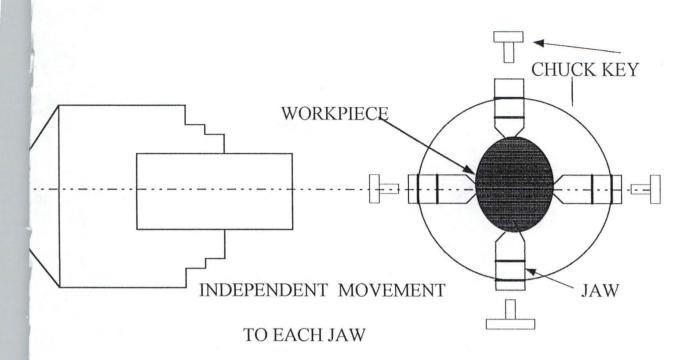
4 - JAW INDEPENDENT CHUCK
